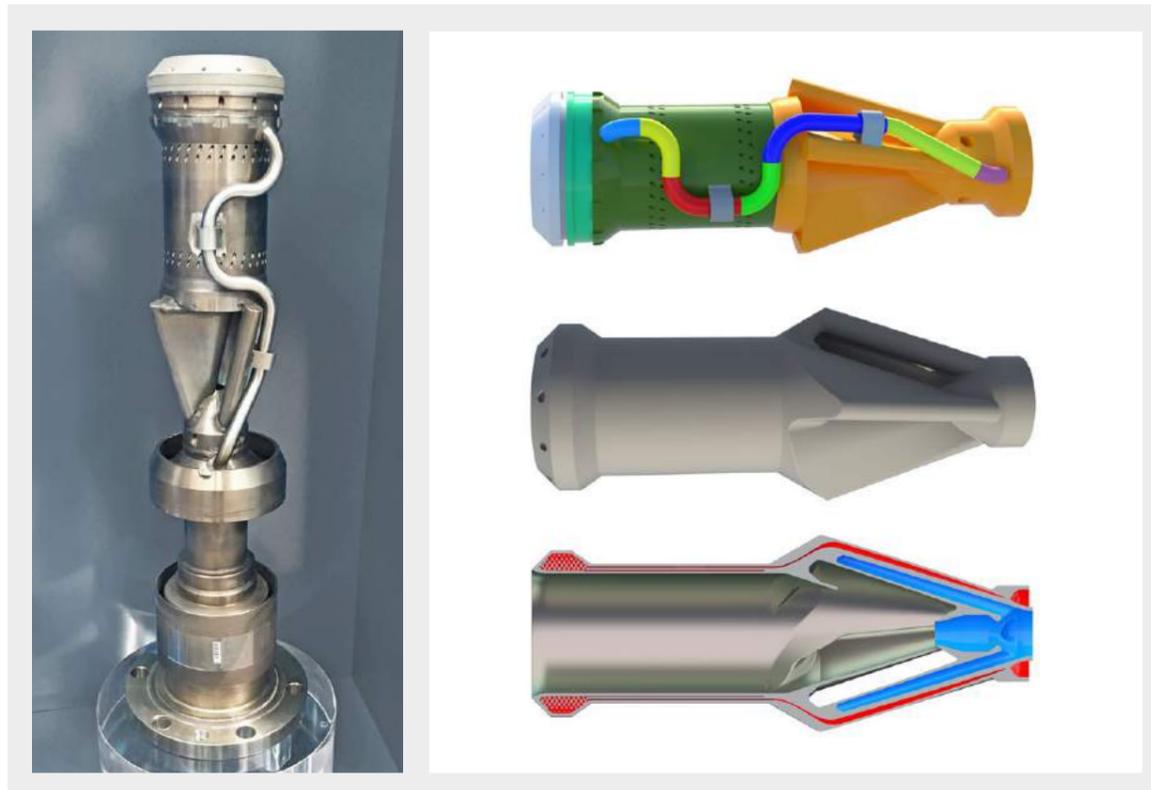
A conventionally manufactured burner repaired using AM is shown on the left, with the repaired section visible at the top. Top right shows the original complete burner component, middle right shows the new AM design, and lower right shows a cutaway view highlighting the lattice structure
